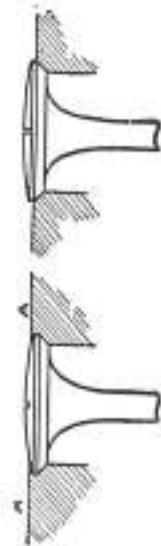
SHOWING WAY A Valve must sit in GROOVE IN EXCESSIVELY
